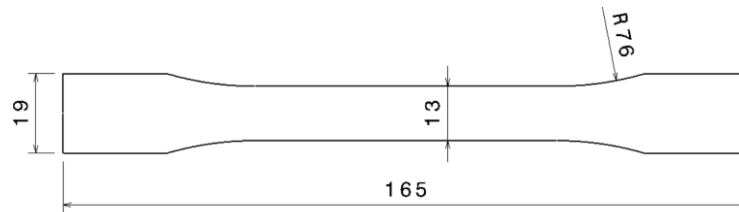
TYPE I Specimen Dimensions: Length overall 165mm, Width of narrow section 13mm, Width overall 19mm, Radius of fillet 76mm
